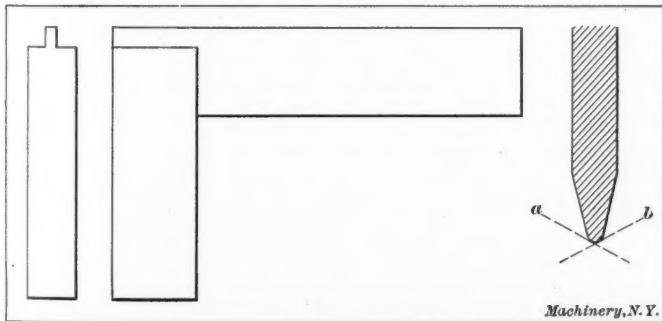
Try Square and Enlarged Section of Knife-edge Blade
